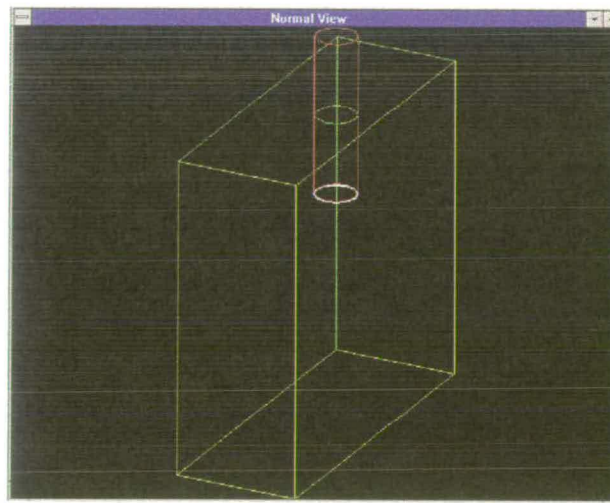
Selected datum faces for Set-up 1.
